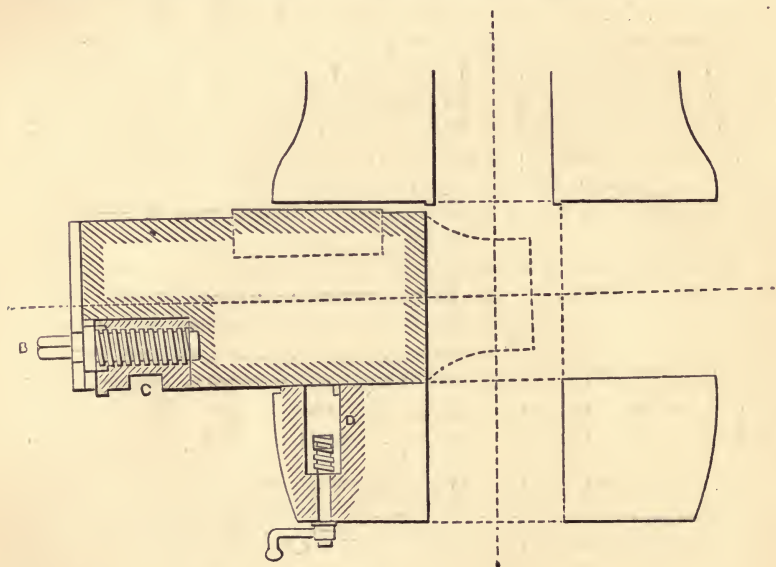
Krupp's Cylindrical Wedge (9-in. BL. gun). Horizontal section.
